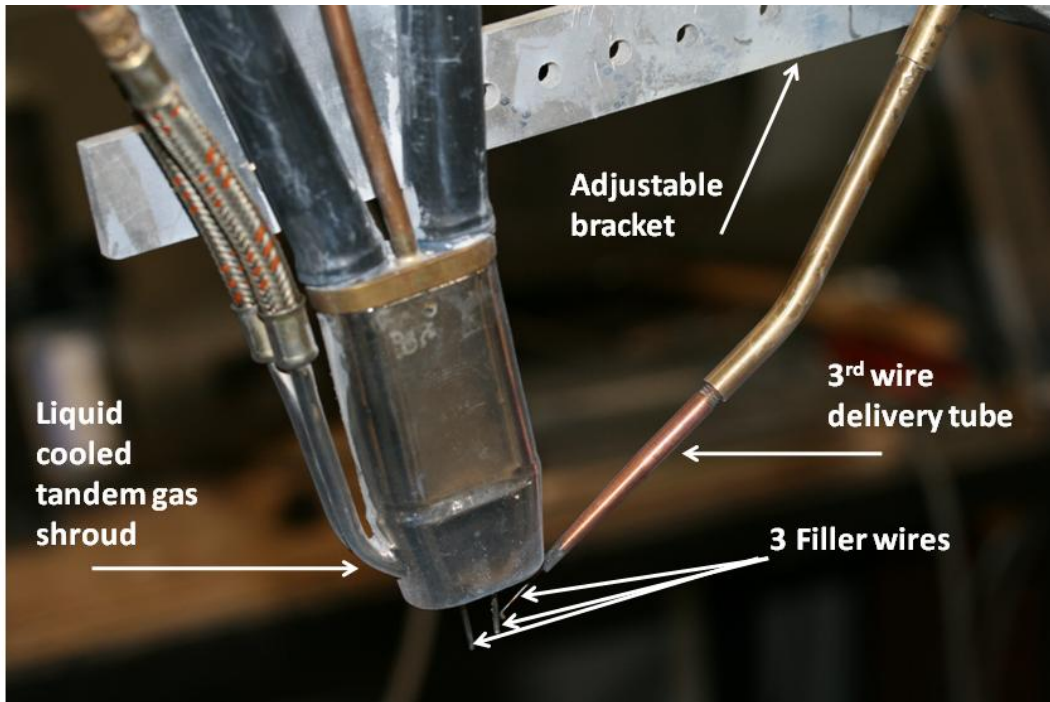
Modified tandem welding system to include 3 filler wires
